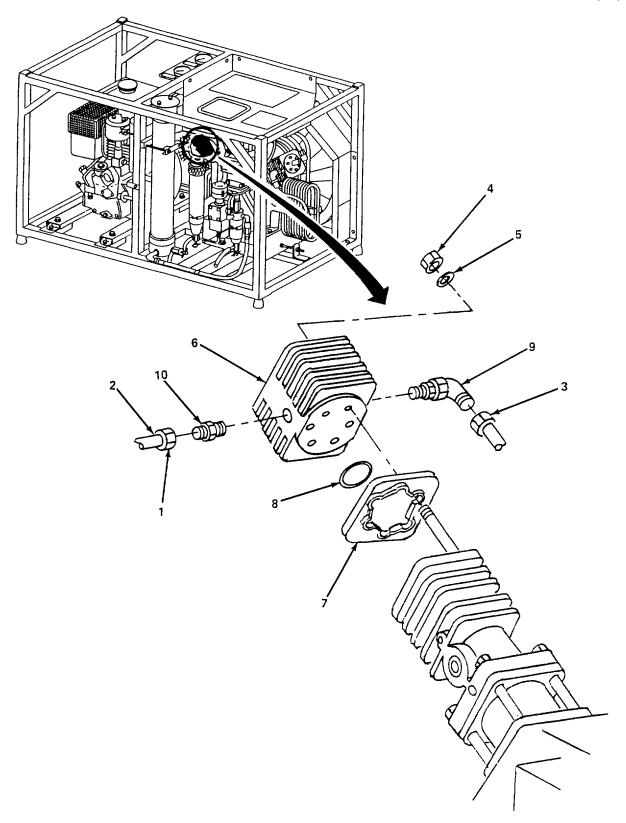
Third Stage Valve Head Assembly, Replace.
